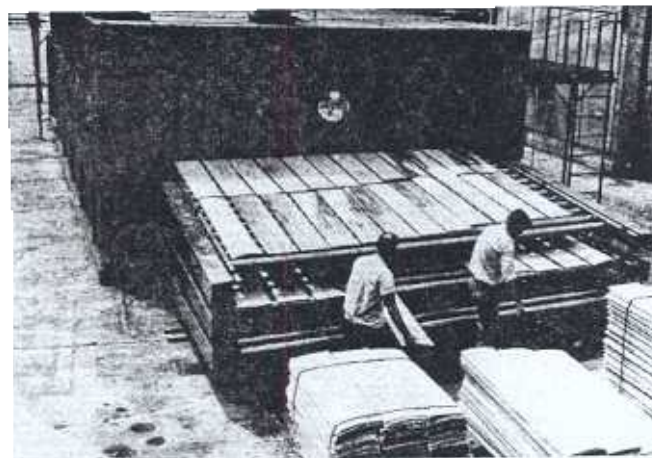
Infeed end of jet dryer used to dry group C veneers. Only the center and bottom decks were used. This dryer has four heated sections and one cooling section. Each section is 6 feet long. The veneers shown were not used in this study but the photo illustrates the infeed mechanism. (Photo by Moore Dry Kiln Company.)
